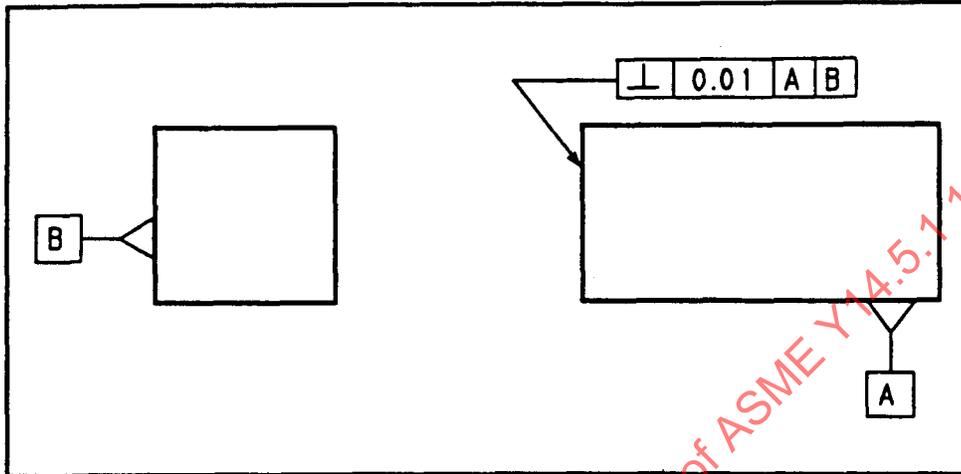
PLANAR PERPENDICULARITY OF A PLANE; PRIMARY DATUM PLANE; SECONDARY DATUM PLANE CONTROLS ROTATION OF THE TOLERANCE ZONE ABOUT THE PRIMARY DATUM PLANE
